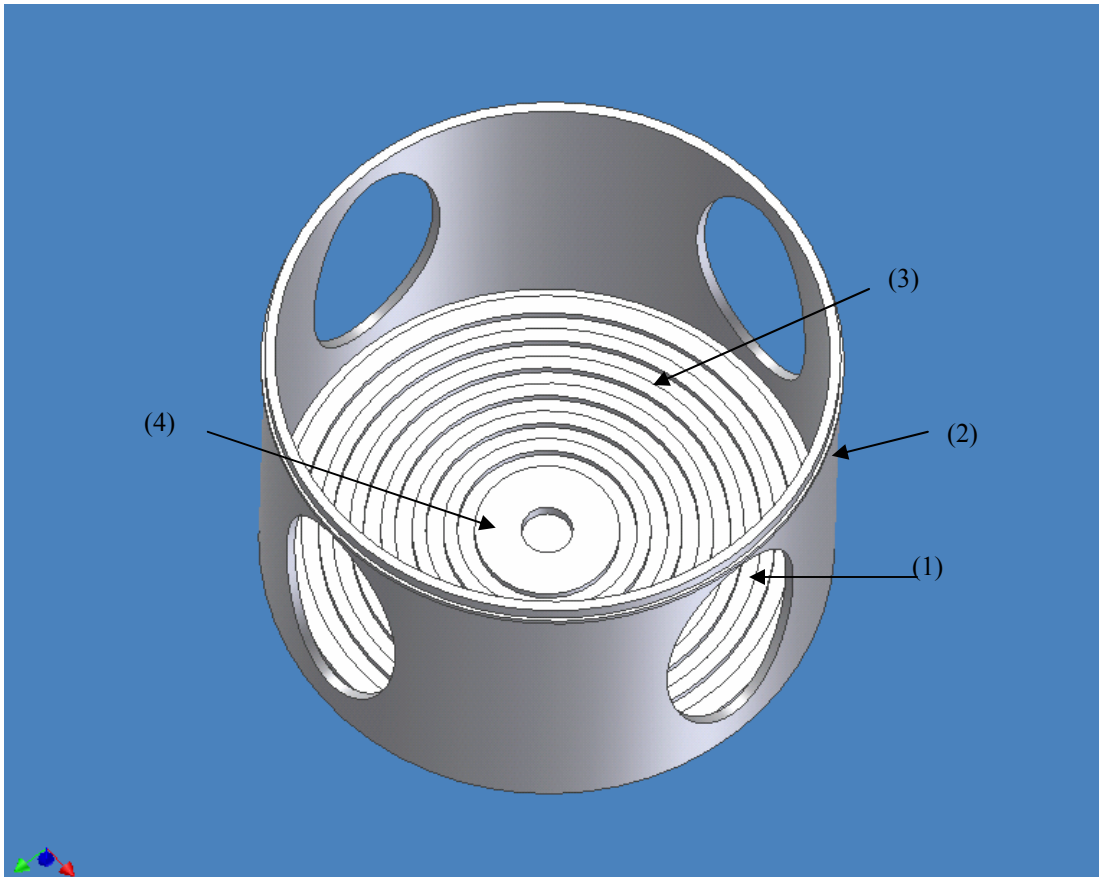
Outer Cylinder/Stator – (1) Elliptical hole; (2) Flange seating; (3) Labyrinth sealing; (4) Sleeve seating
